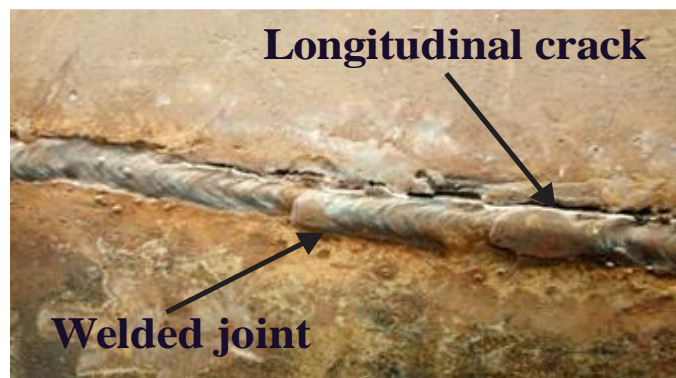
2 Cracked welded joint shell of the pressure vessel (Hibret Industrial Engineering December 2019)
